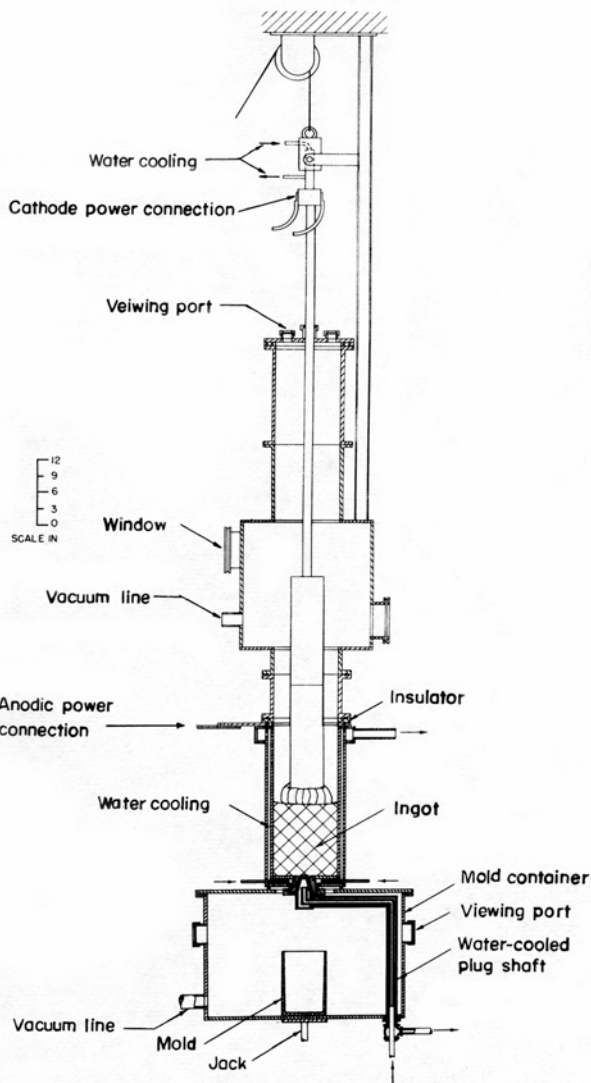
A schematic showing the basic design of a bottom pour VAR casting furnace in use at ARC in the early 1950's.
